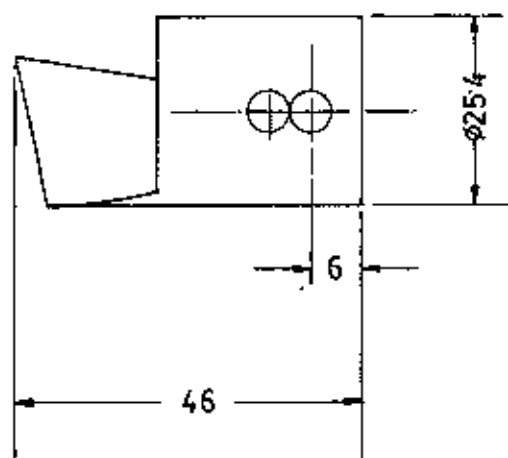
Single tooth fly cutter mounted on the tool holder
